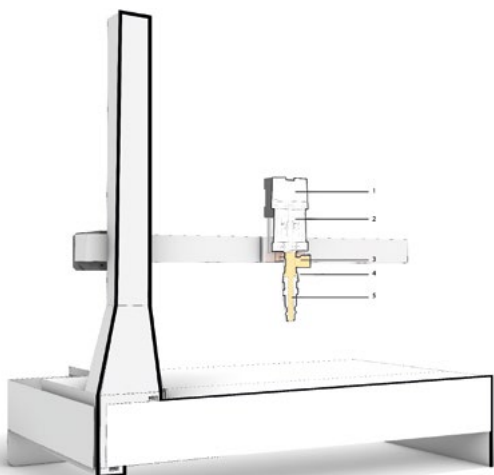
Lutum (R) 4 Screw ceramic extrusion system consists of (1) stepper motor, (2) bearing, (3) ceramic inlet, (4) nozzle adapter, (5) auger screw.
